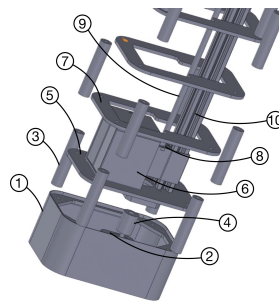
Exploded view of the elevator model: (1) Bottom skirt, (2) Stepper motor, (3) Tube spacer, (4) Flex axle, (5) Bottom floor, (6) Cabin + Cabin door setup, (7) Mid floor, (8) Lead nut, (9) Threaded rod, (10) V-slot RatRig profile.
